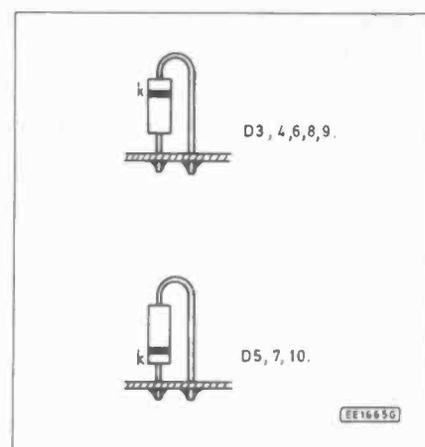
Polarity guide for mounting the diodes on the p.c.b.
